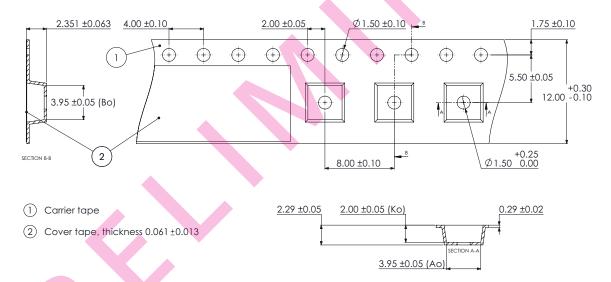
Pocket tape dimensions for L1I0-0XXX150000000.
